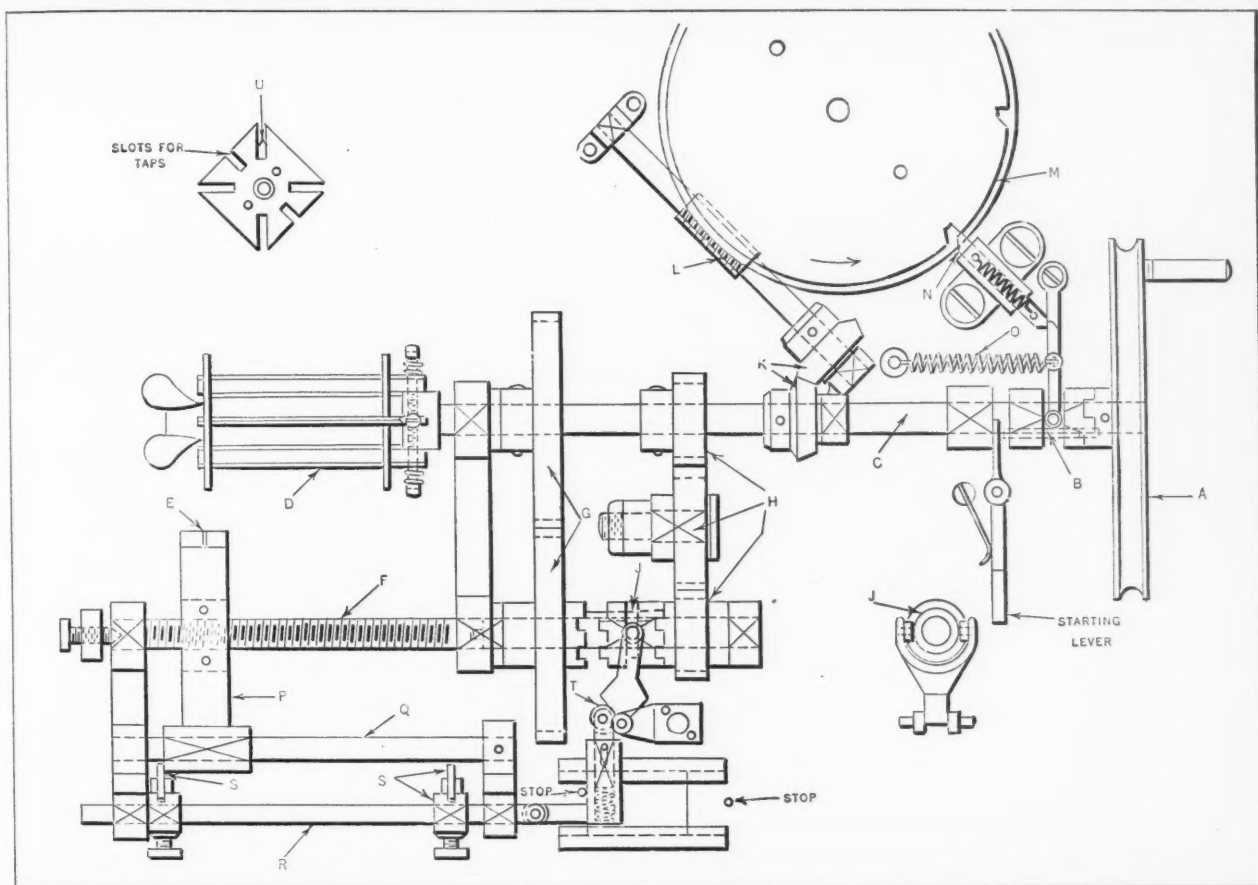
Another Automatic Coil-winding Machine Intended for Heavier Wire than Machine Shown in Fig. 1
